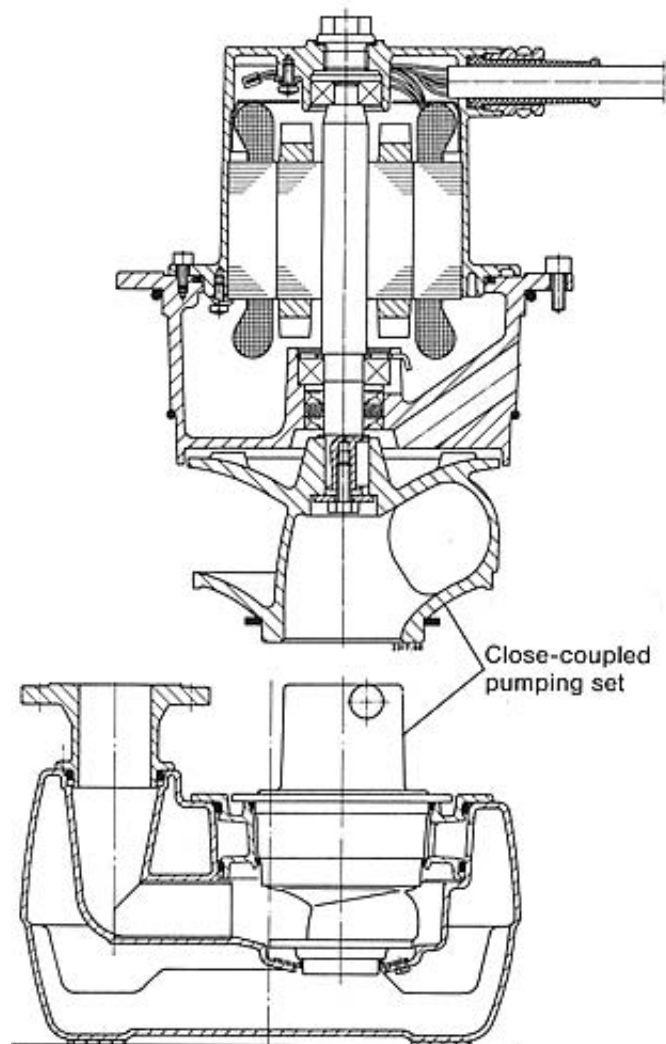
Faeces pump in close-coupled design in a faeces lifting plant
